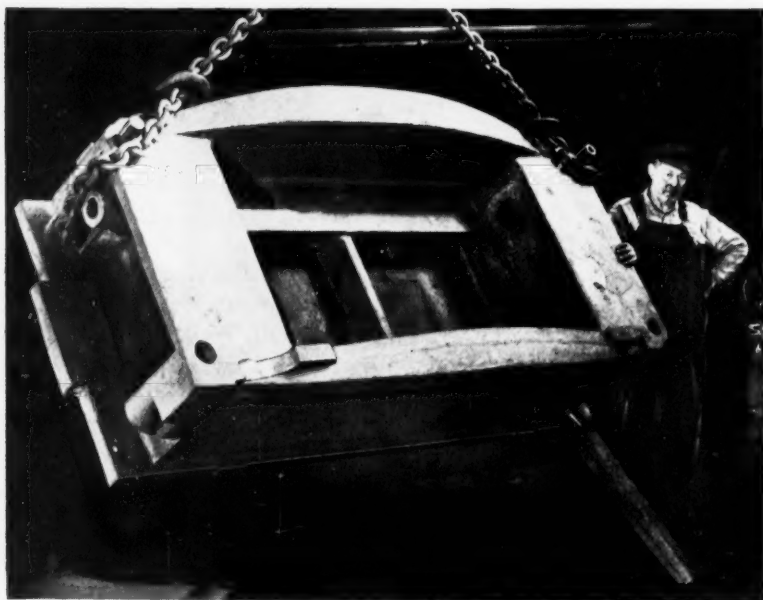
Large Casting which Illustrates the Smoothness of Surface and Sharpness of Corners Obtainable through the Use of Cement-bonded Molds
